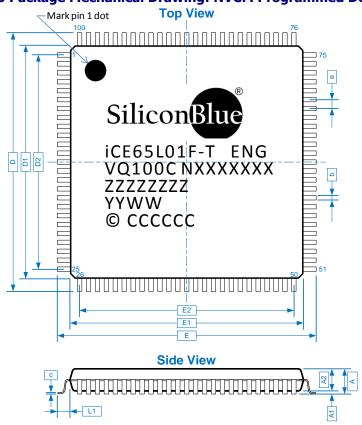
VQ100 Package Mechanical Drawing: NVCM Programmed Device Marking
